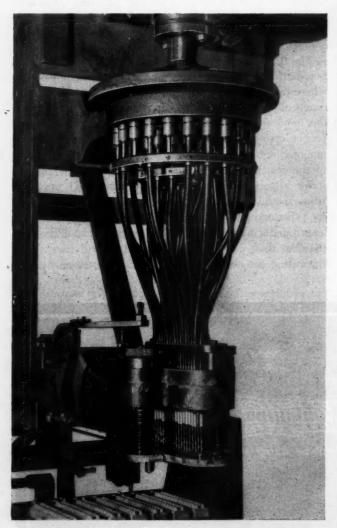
Flexible shafts provide unusual versatility in this 38-spindle universal drilling machine
